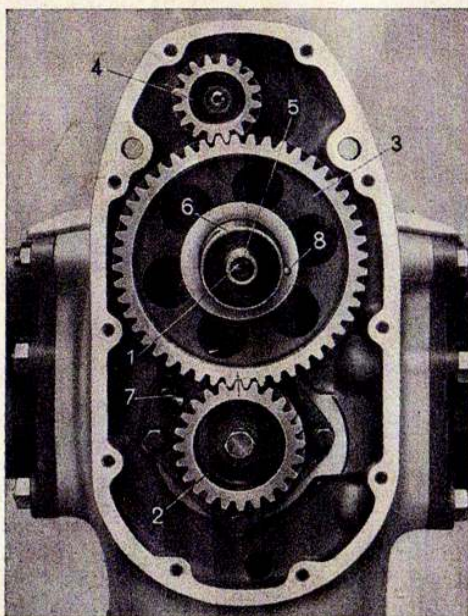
Spur gear drive of camshaft R 61/66/71.
